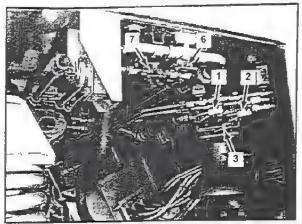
REAR SANDER CUT-OUT COCK. E-42745.
